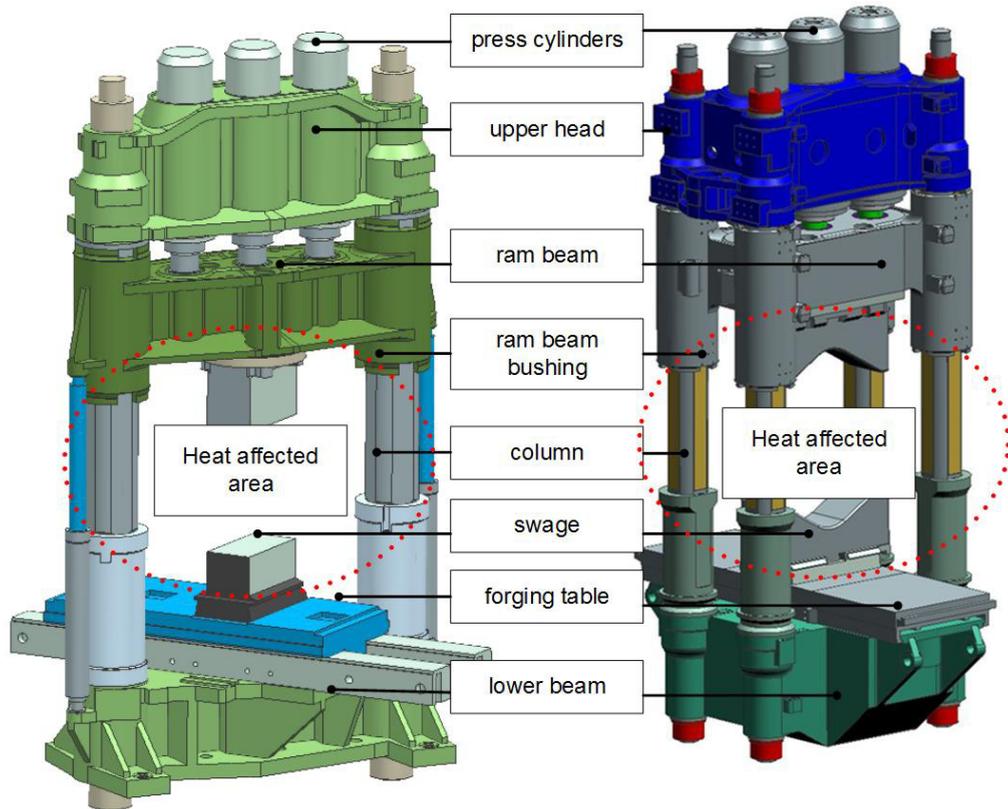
(a) Hydraulic forging press CKV 40/50 MN with heat affected area, (b) Hydraulic forging press CKV 84/105 MN.
